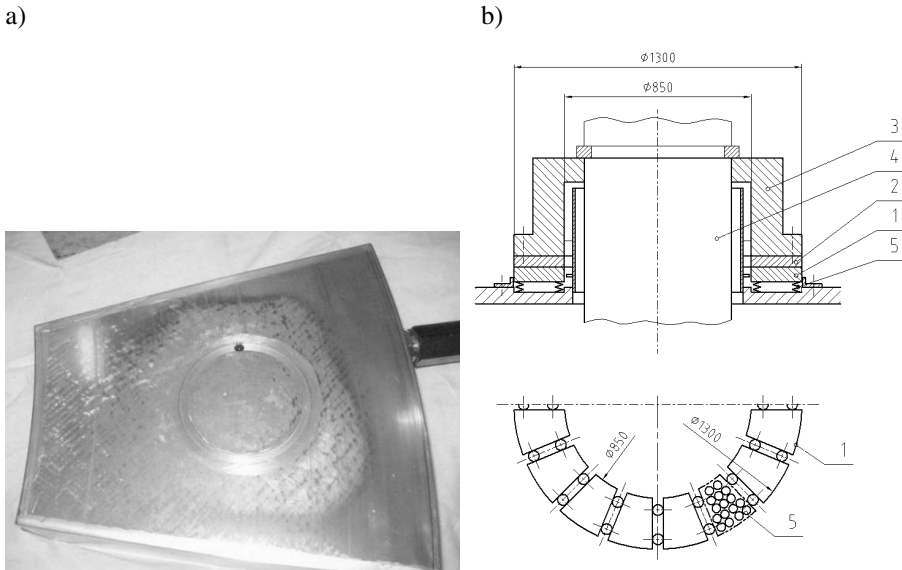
Water turbine thrust bearing: a) single bearing pad photo – excessive wear due to failure visible on the surface; b) spring support scheme: 1 – bearing pad, 2 – sliding ring, 3 – flanged bush, 4 – generator shaft, 5 – set of supporting springs
